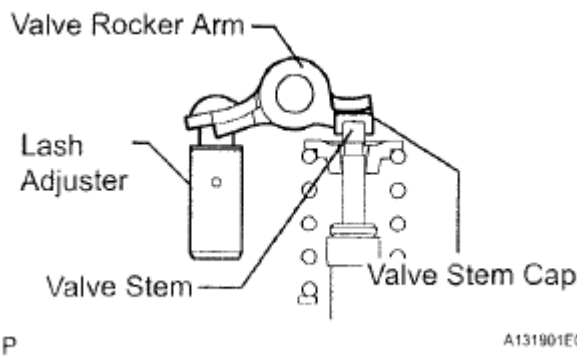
Identifying Valve Rocker Arm, Lash Adjuster And Valve Stem
